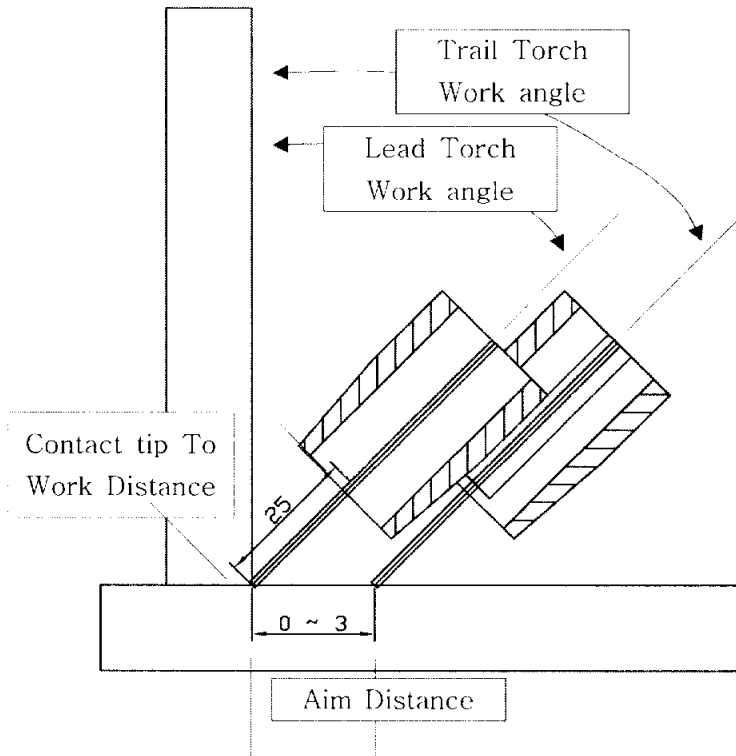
Schematic of tandem fillet welding (traverse)
